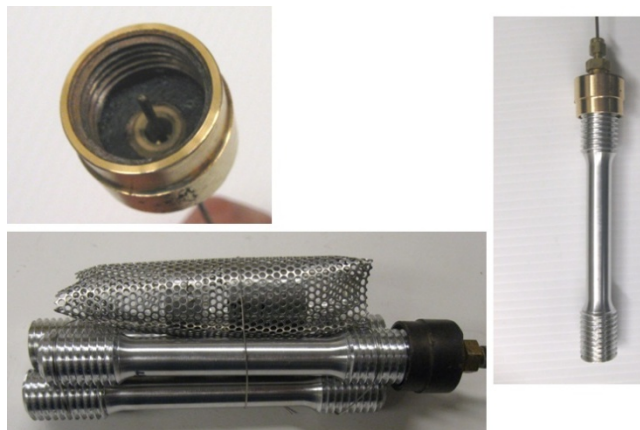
Method used to age harden samples for tension testing. The contact thermocouple is attached to the threaded hat for temperature measurement.
